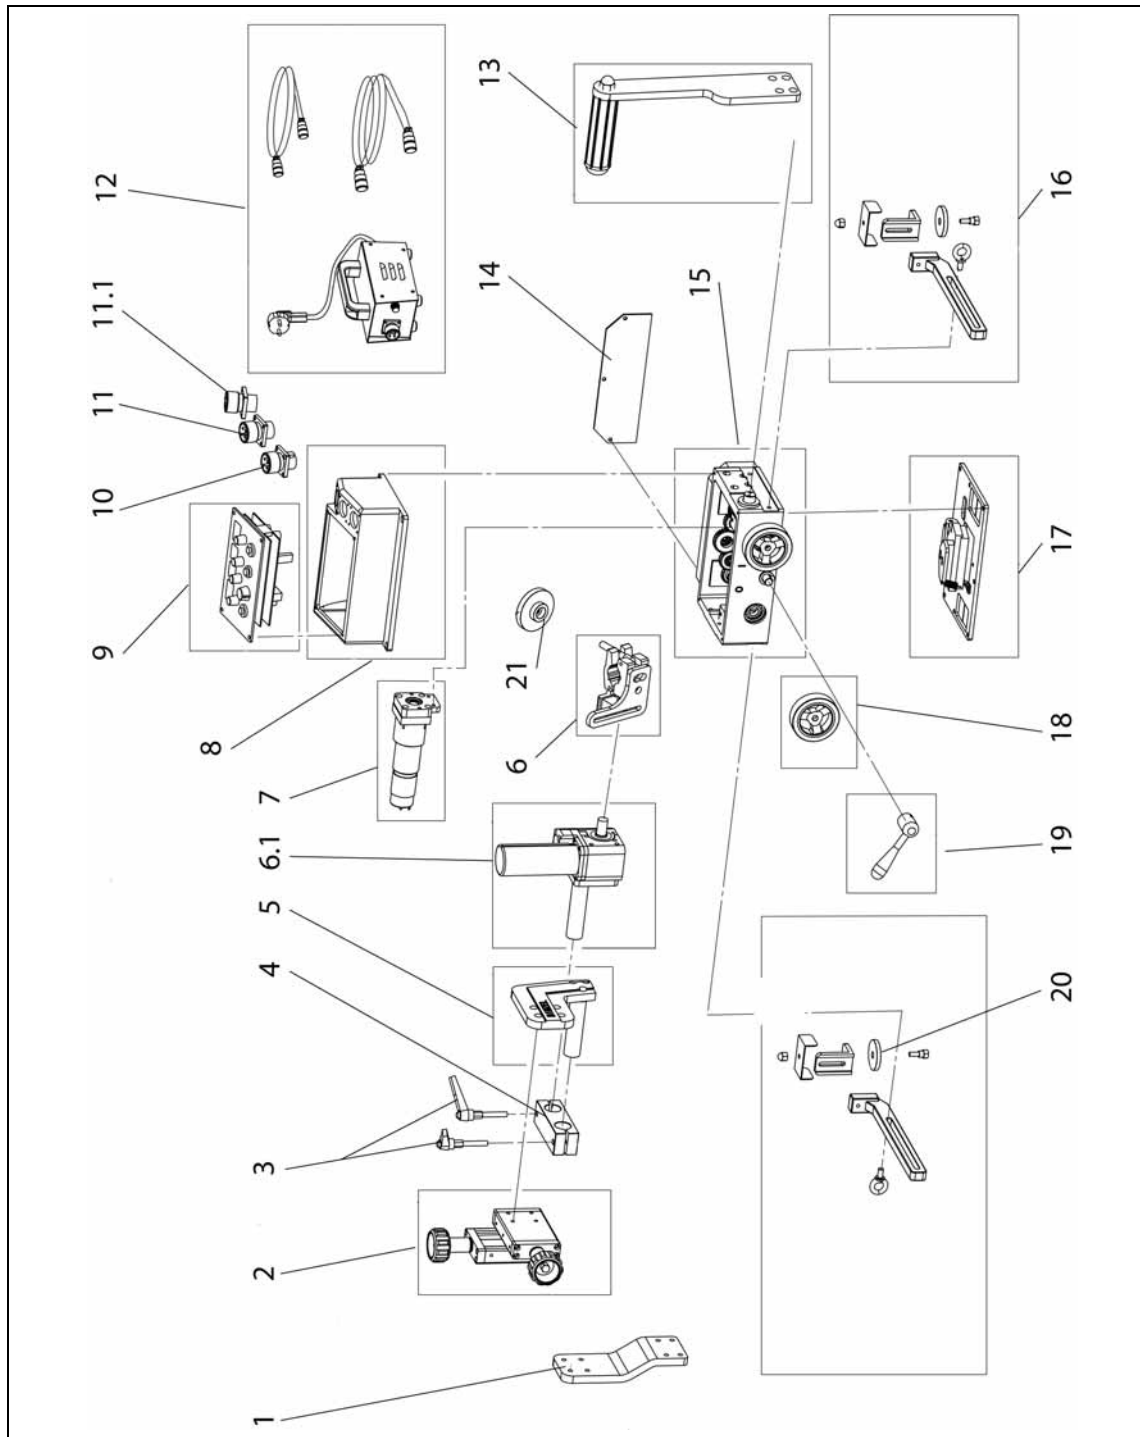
Spare and wear parts for ABI-CAR E-1200-O
